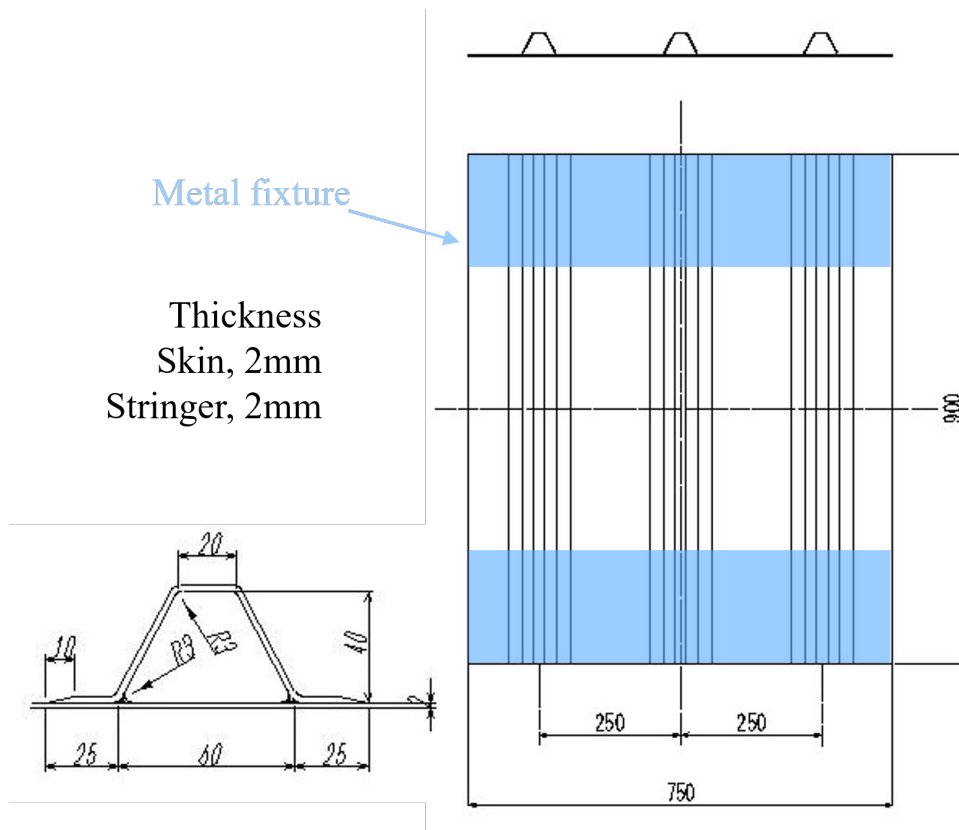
Detailed dimensions of the large stiffened panel and the hat-shaped stringers. All dimensions in mm.
